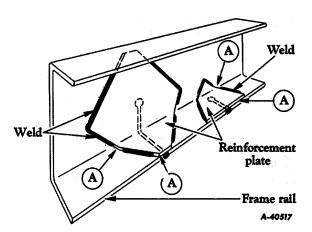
Suggested Types of Reinforcing Plates and Method of Attaching to Frame Rail.
